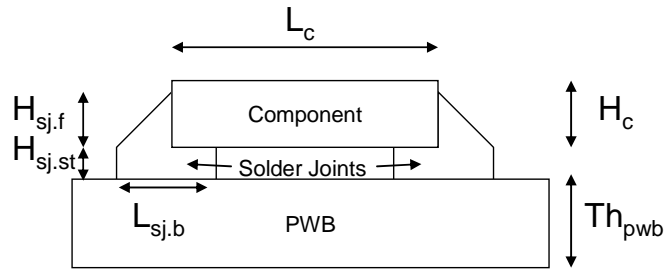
Thermo-mechanical fatigue failure of solder joints
